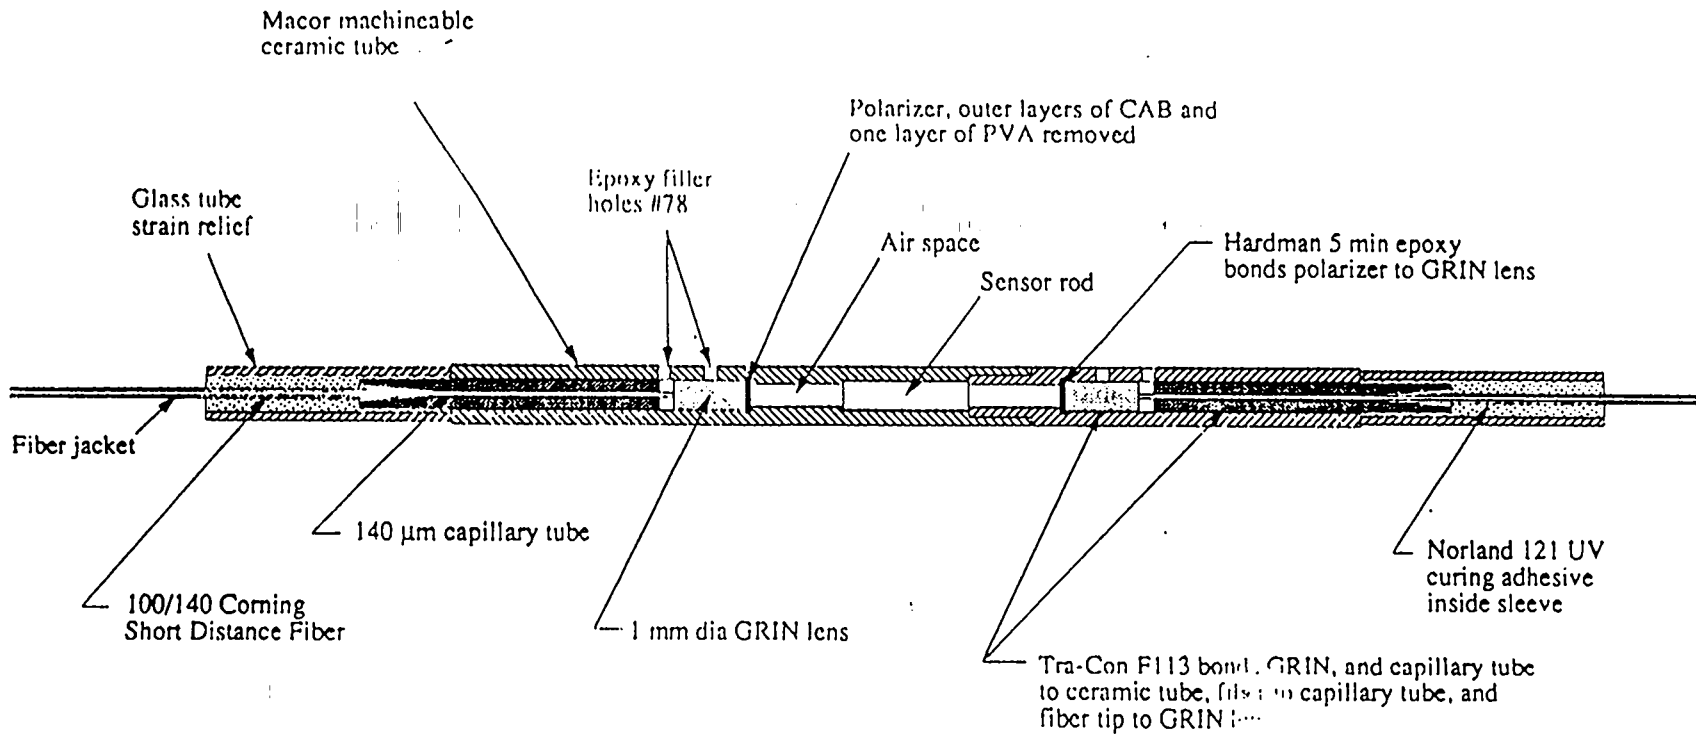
Faraday Sensor Using 25 mm Fused Silica Rod and GRIN Lenses, Split Tube
